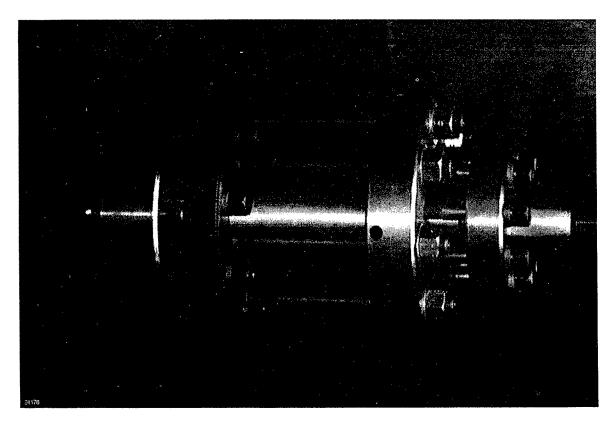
View of the third stage launcher assembly installed on the muzzle of the UDRI 75/30-mm, two-stage, light-gas gun.
